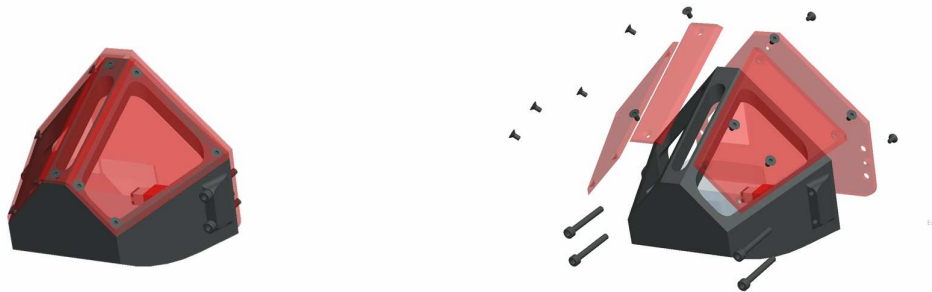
FRONT (LEFT) AND EXPLODED VIEW (RIGHT)
